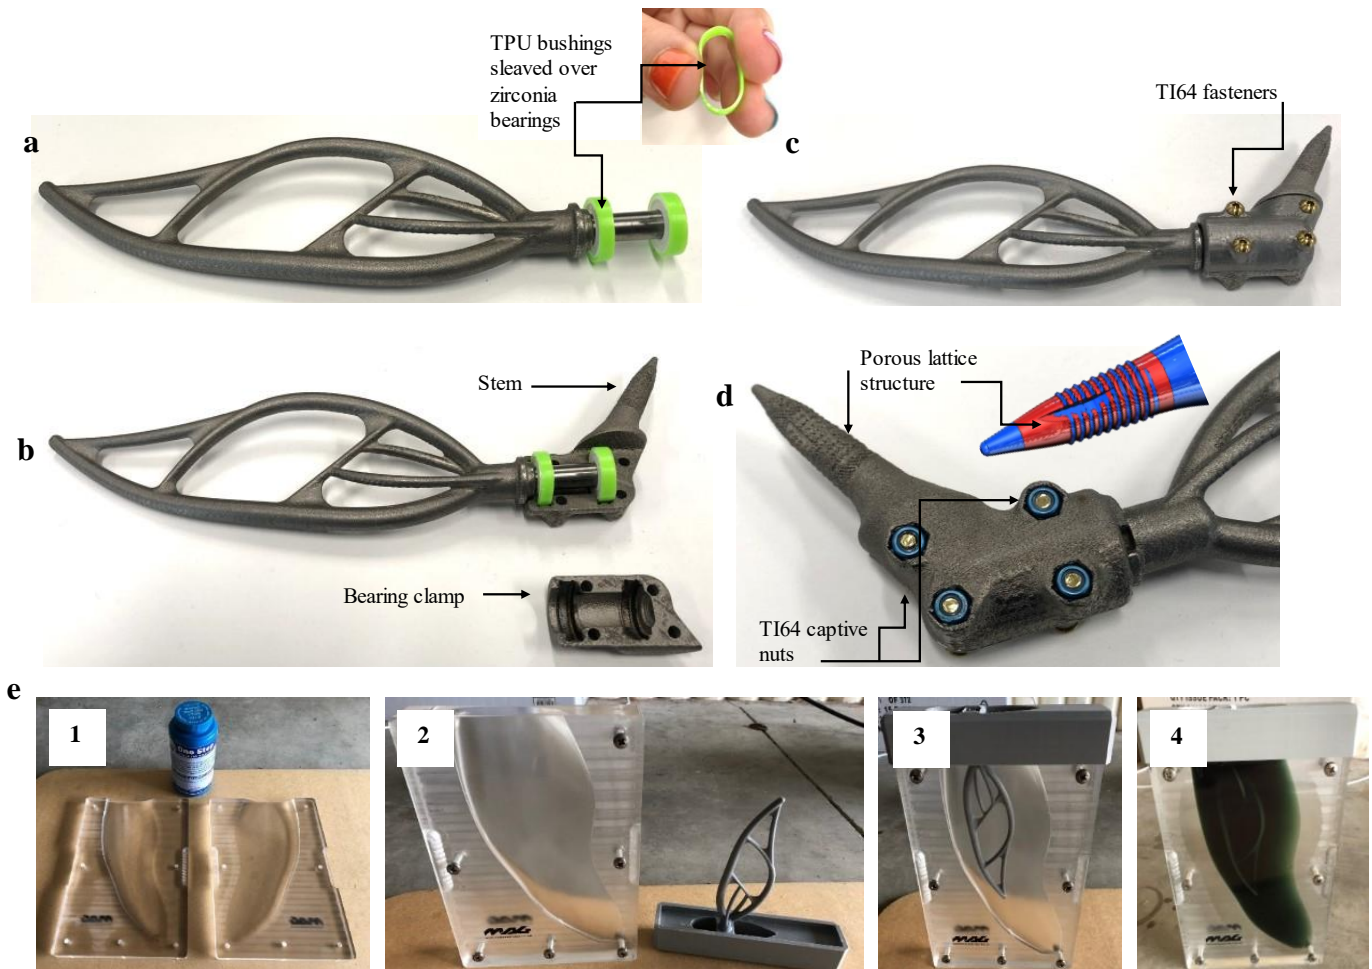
3D printed titanium prosthetic assembly. (a) Flipper mechanism showing Soft TPU bearing bushings to help reduce impact loadings. (b) Flipper mechanism being assembled to stem. (c) Fully assembled prosthetic without the soft flipper. (d) close up of the porous stem structure (Red areas are the porous zones with blue areas solid zones) and captive nuts for securing stem to flipper mechanism. (e) Flipper casting process. (1) split mould preparation. (2) assembly of split mould and flipper mechanism. (3) Full mould assembly. (4) Casting of soft rubber flipper.
